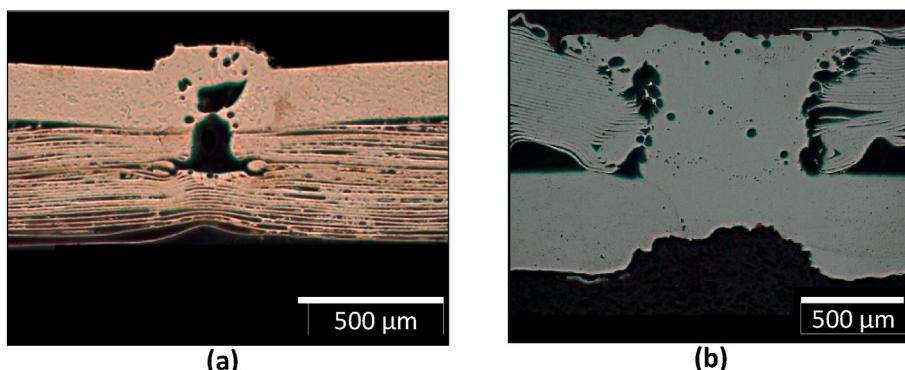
Battery foil to tab laser welds with (a) insufficient penetration and high porosity and (b) foil to weld bead detachment.
